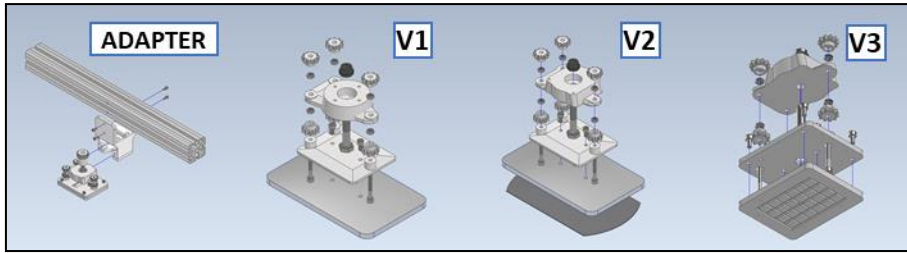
Build platform designs through different iterations. Adapter had been designed to fit V1 alignment system and printer Z-gantry. Leveling system consisting of three knobs in all build platforms is inspired to V1 design. V2 improved the alignment system using smaller dimensional tolerances for the alignment slots and added a silicon wafer glued to the platform. V3 added a vacuum chuck with recessed 2-mm channel grid and alignment pins.
